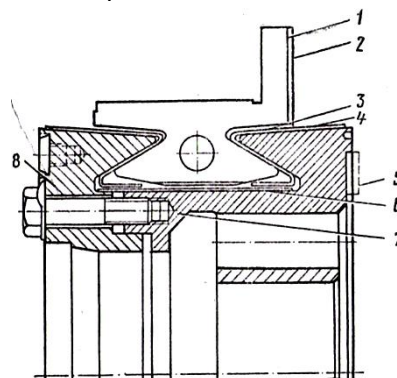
Collector motor TE 006: 1 - collector plate; 2 -, micanite spacer; 3 - collar (molded mikanit); 4 - tire; 5 - balance weight; 6 - insulation sleeve (glass cloth, glass tape, glass cord); 7 – bushing manifold; 8 - thrust ring.
